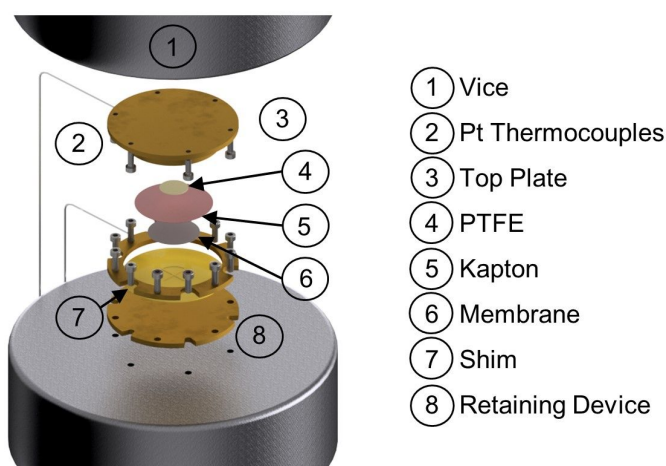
Hot-Embossing setup used to imprint the PCTE membranes. The setup is based on a modified tensile test machine, which also allows for precise heating and cooling. Figure reproduced from [1].
